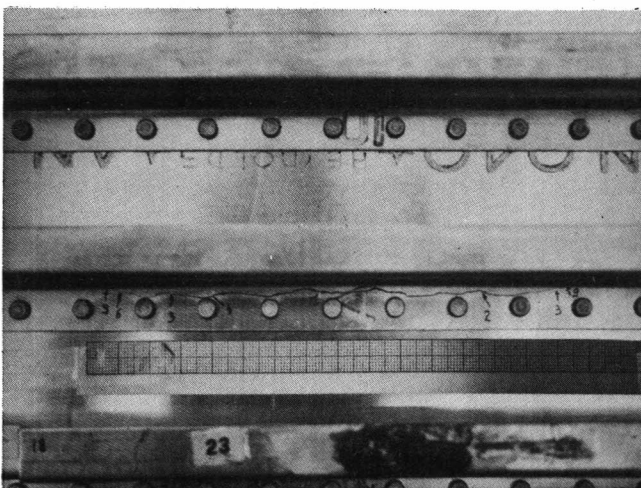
Fatigue cracks in the stringer of panel tested in acoustical chamber.
